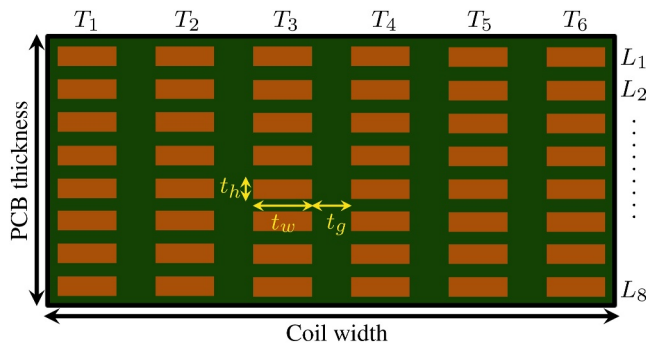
The cross section of a real PCB coil side with 6 turns and 8 layers, PCB manufacturers can produce up to 32-layer PCBs. Designers aim to maximise copper area to coil side area ratio, that is, higher slot fill factors to reduce Joule losses. PCB, printed circuit board.
